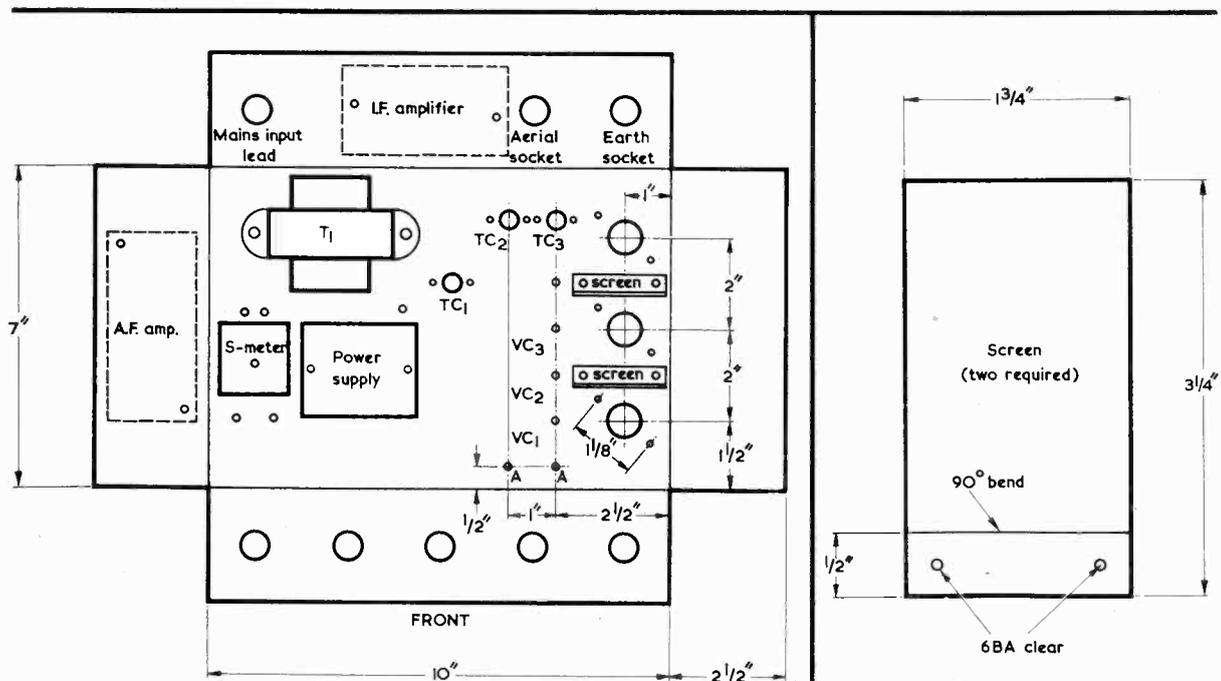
Top view of the chassis. The sides are shown opened out to assist in illustrating the layout
